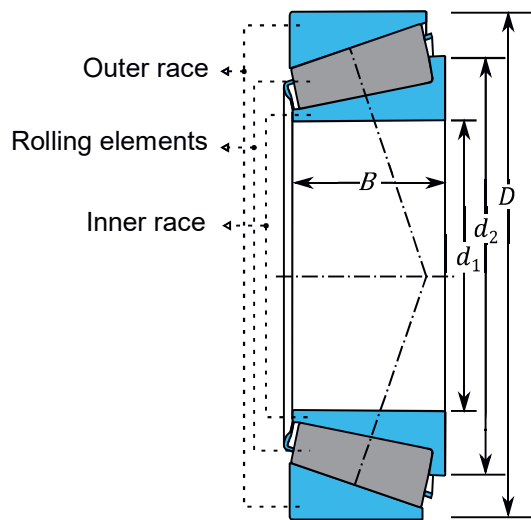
Schematic structure of the investigated tapered roller bearing.
